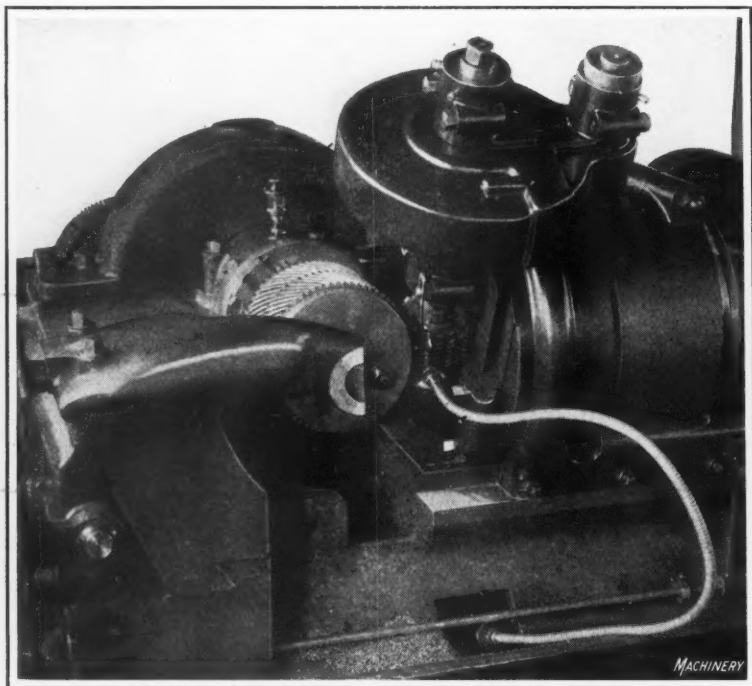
Horizontal Type of Machine cutting Two Helical Gears simultaneously
